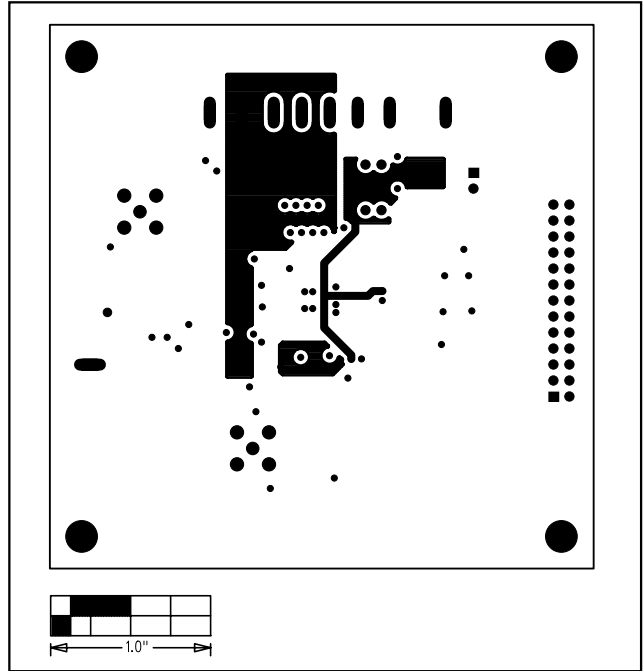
MAX1420 EV Kit PC Board Layout—Inner VCC Layer
